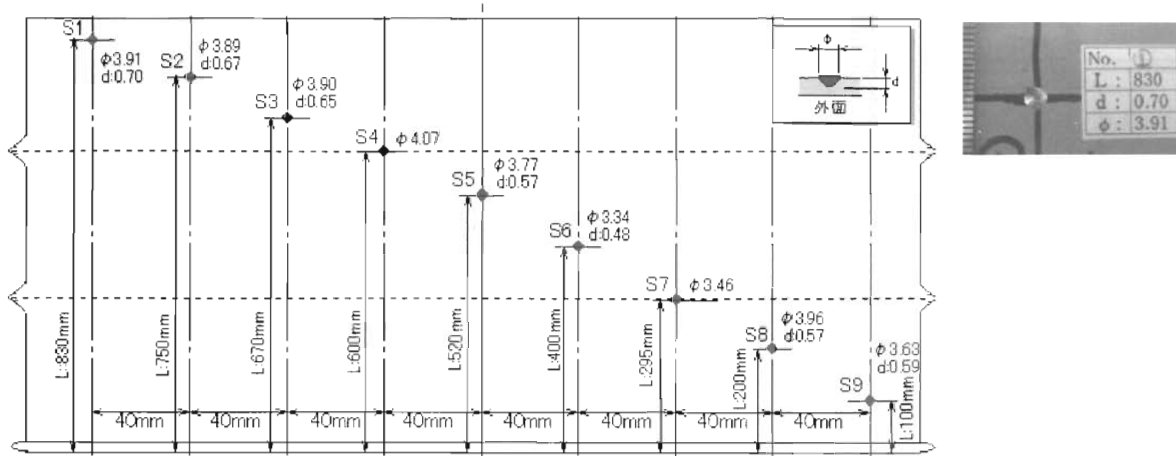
Mock-corroded Holes on Real Drum Test Piece (Side Panel)
